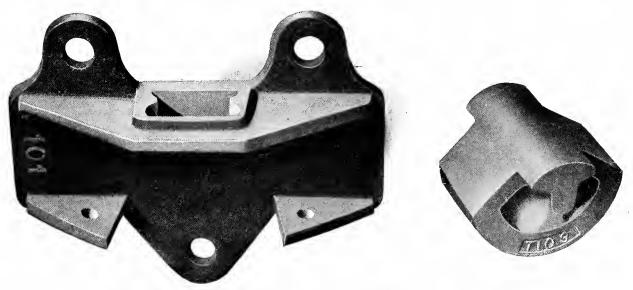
Rocker Carrier and Rocker for Cardwell Rocker Side Bearing.
